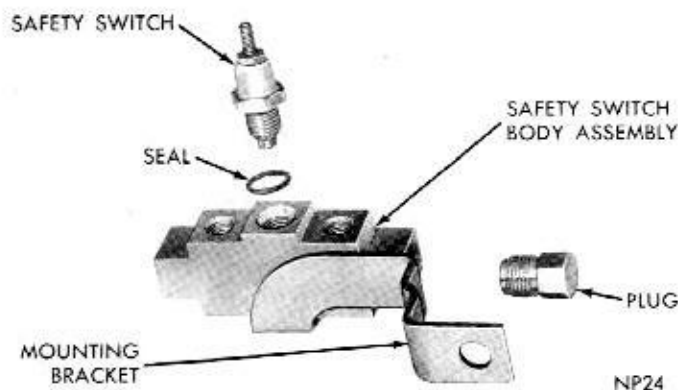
Hydraulic System Safety Switch (Exploded View)
